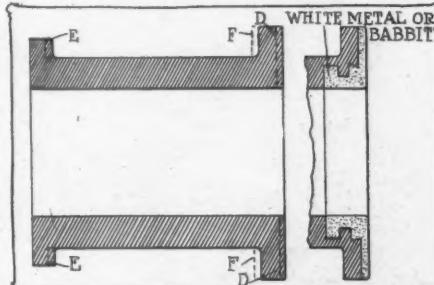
REBUSHING FLYWHEEL-END BEARING
